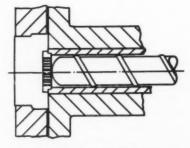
Basic die blank in position at end of extruder barrel, with breaker plate in place
